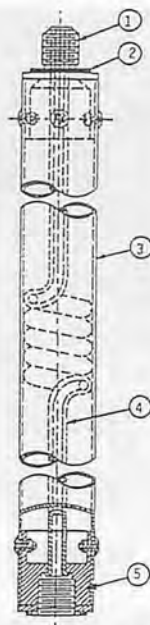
Details of the aluminium pipe and accessories: 1. coupling screw; 2. rubber seal; 3. aluminium pipe; 4. air tube; 5. coupling nut.
